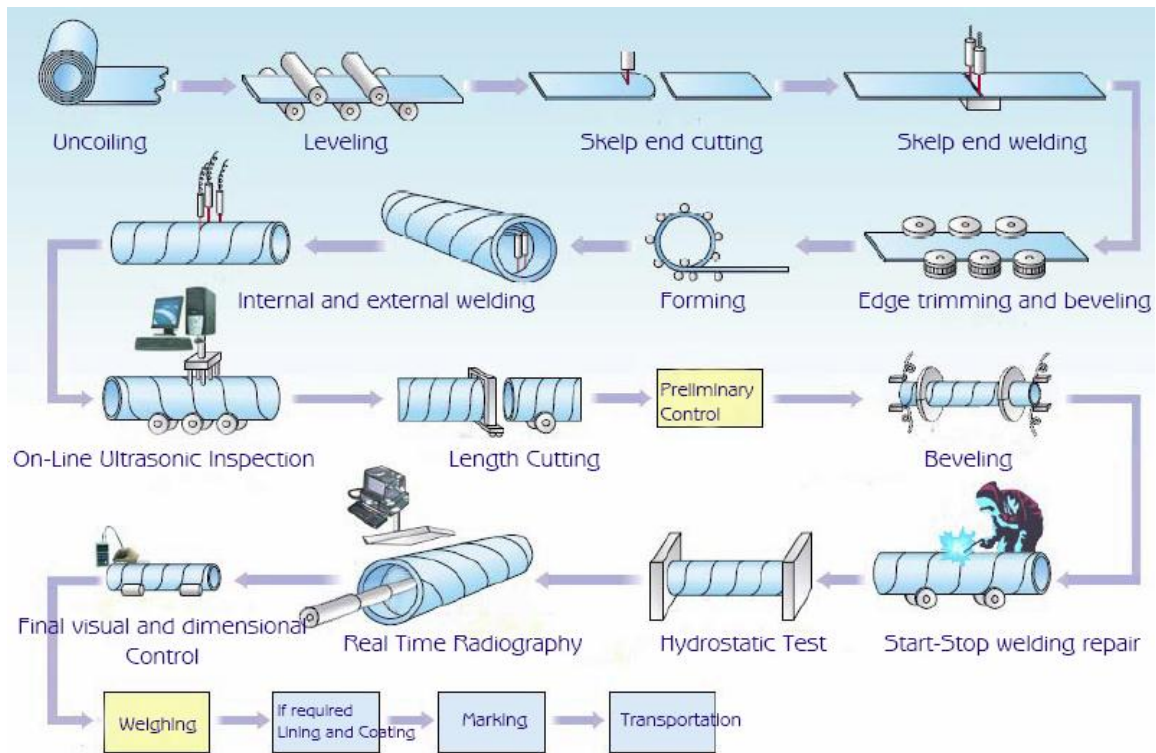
Spiral welded pipe production steps, [Ozmaç Boru Co.]
